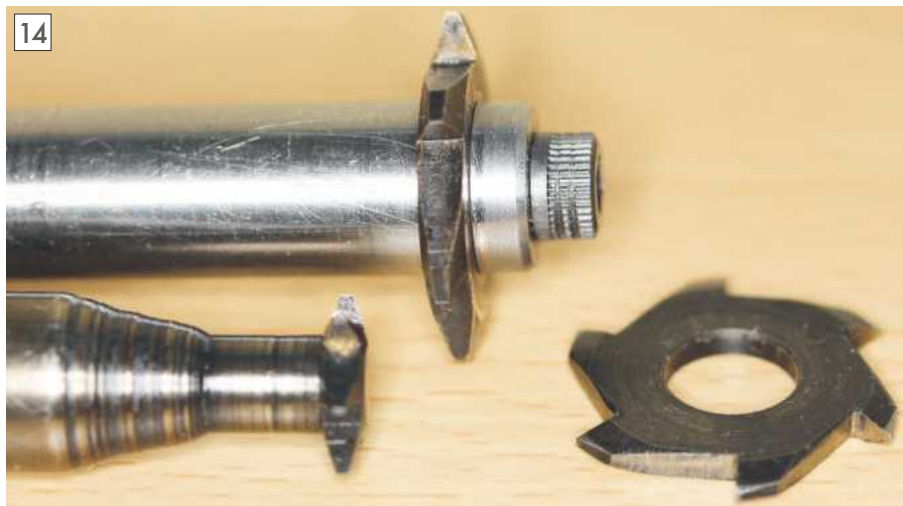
shows three rack-form gear cutters made using the milling spindle and the dividing attachment described above. The material is silver steel rod or gauge plate. The tooth flanks are turned using the top slide set to the required tooth pressure angle. The cutter teeth are machined with an end mill in the milling spindle including relief on the OD behind each tooth tip leaving only a very small length of OD behind the tooth tip which can be further relieved with a slip-stone.
